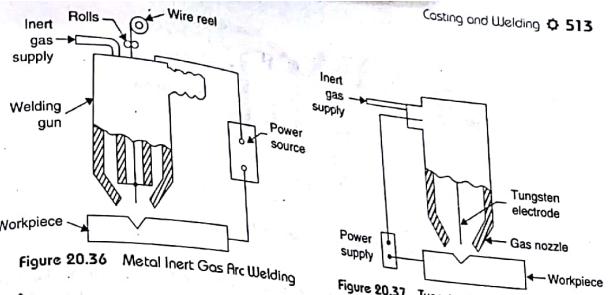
Metal Inert Gas Arc Welding
